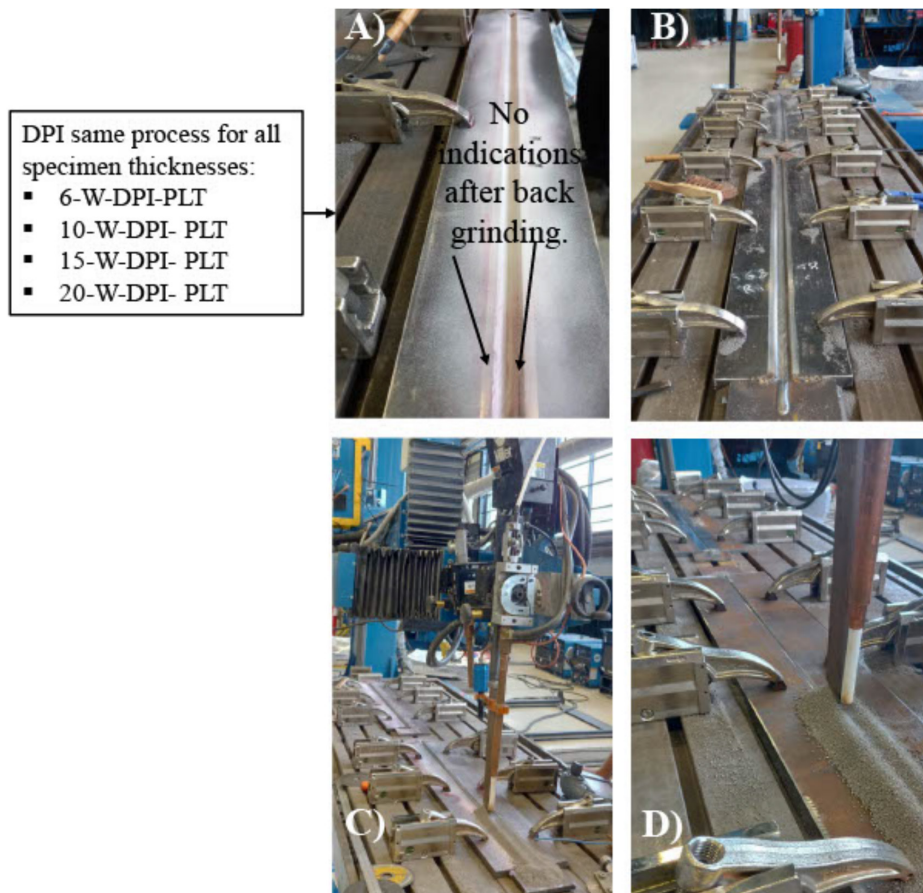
| SAW process stages: (A) After DPI. (B) Plate clamping. (C) Welding setup. (D) SAW process for all specimens. [Colour figure can be viewed at [wileyonlinelibrary.com](https://onlinelibrary.wiley.com)]
